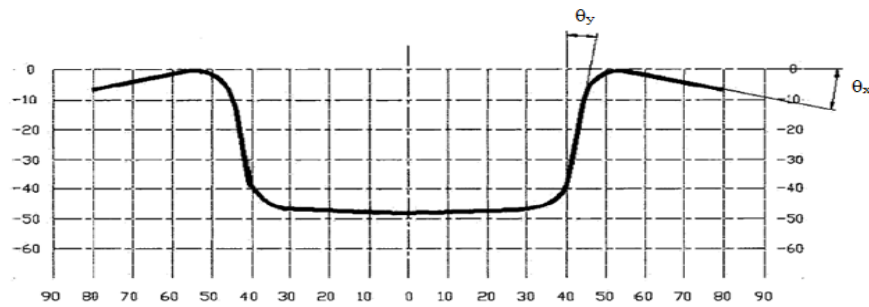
Schematic illustration of the way used to measure the specimens' spring back angles
